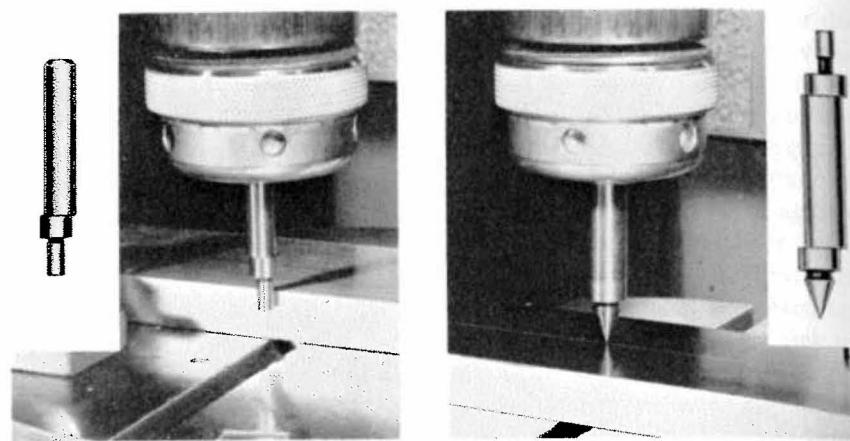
Procedure for picking up the edge of a workpiece using a Moore Edge Finder.
